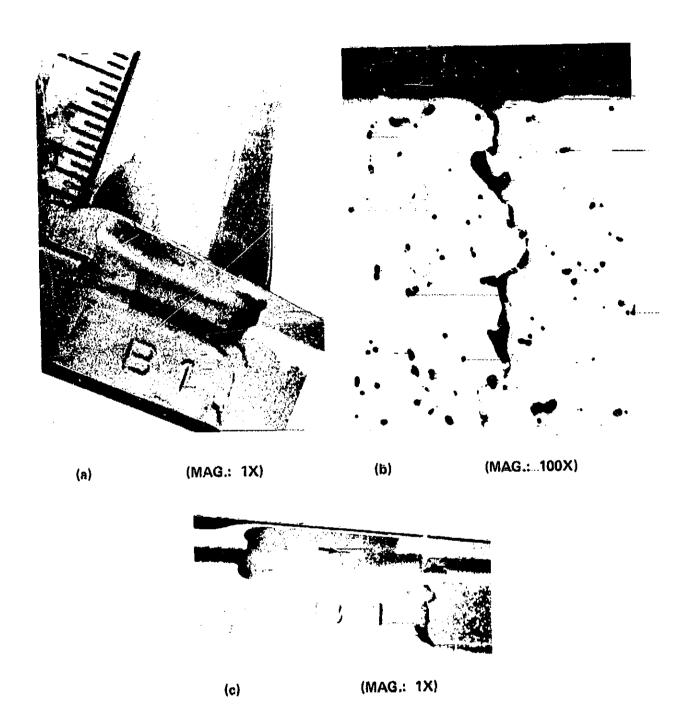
Photographs Illustrating "Hot Tear" Cracks Found in the Platform Areas of Task V Exothermically Cast DS NASA-TRW-R Alloy Turbine Blade Castings. Arrows on (A) and (C) Identify Typical Crack Locations. Photomicrograph (B) Shows the Intergranular Path of the Crack
